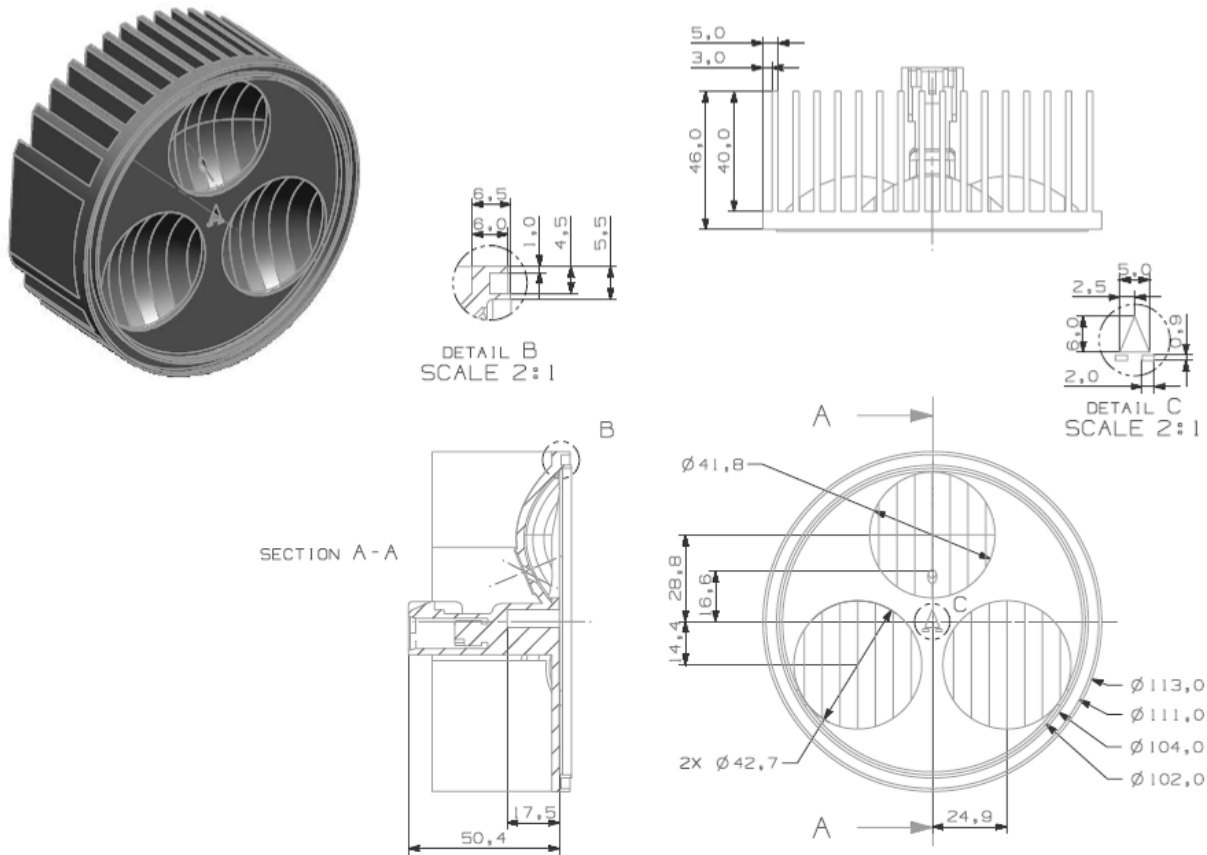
Engineering Drawing of Heat Sink/Housing Redesign
